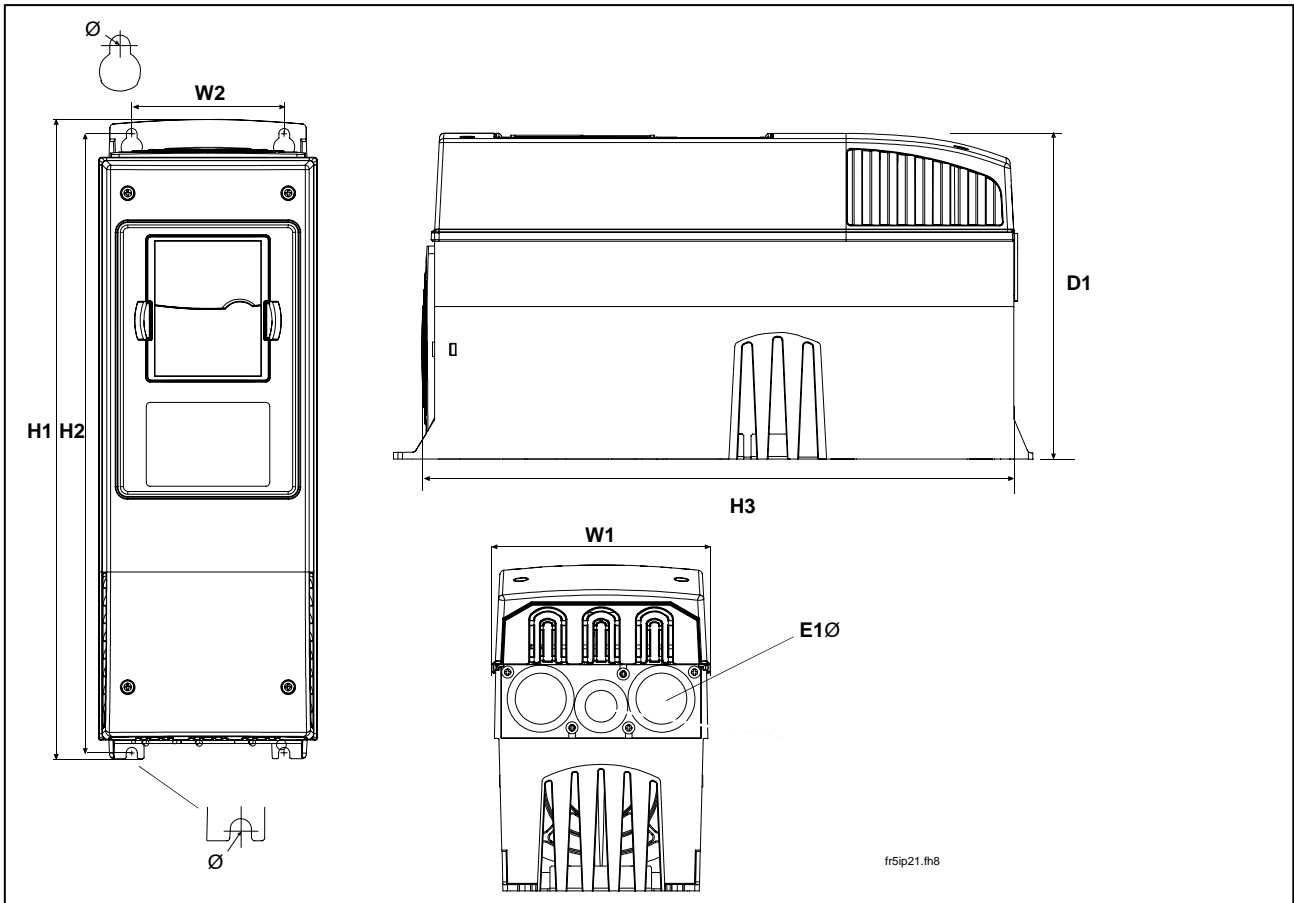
ACCel500 Inverter Dimensions, IP21
